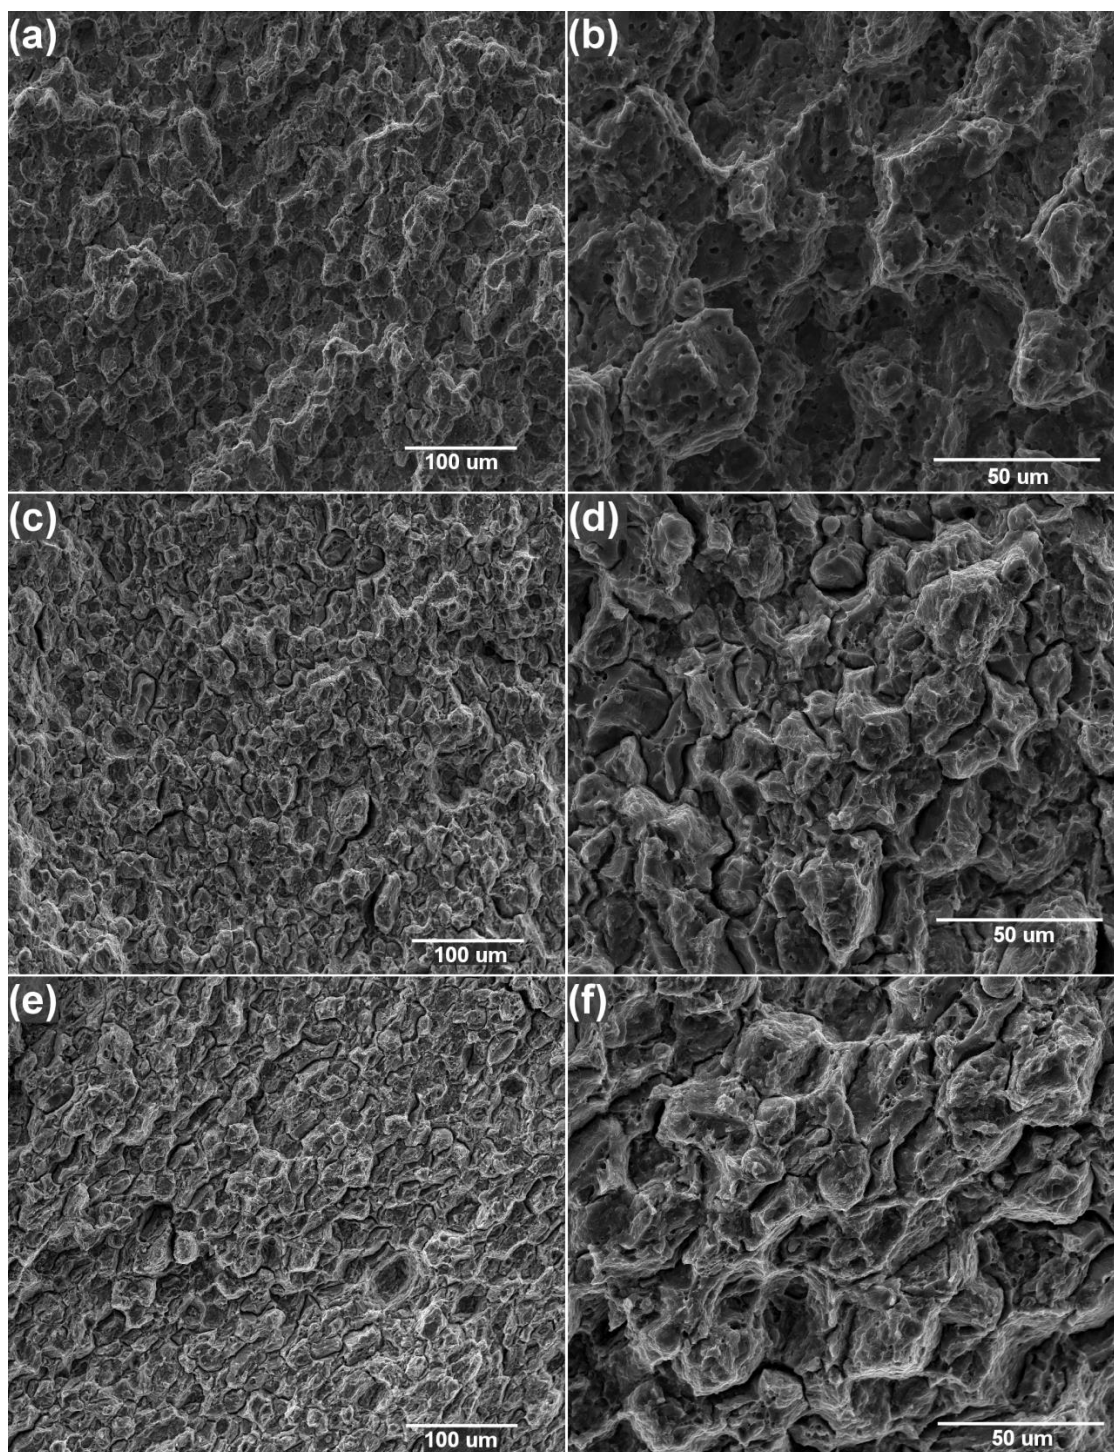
Secondary electron scanning electron microscopy images of fracture surfaces from the specimens manufactured using ball milling and off-gassing. (a,b) off-gassing then sintered at 530°C, (c,d) ball milling then sintering at 530°C, (e,f) ball milling and off-gassing then sintering at 430°C.
